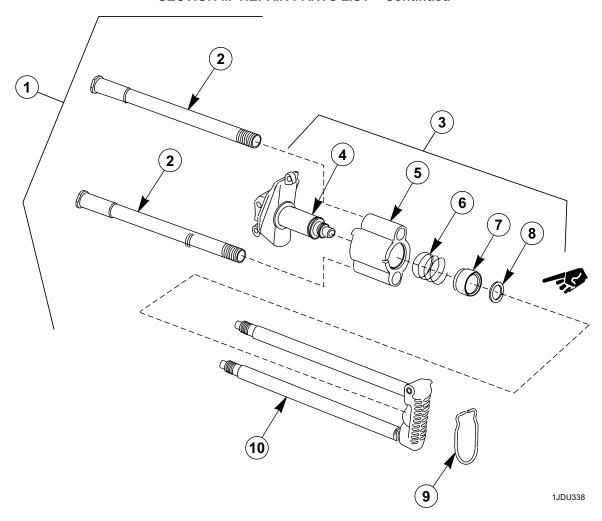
STOCK, GUN, SHOULDER: M5.
